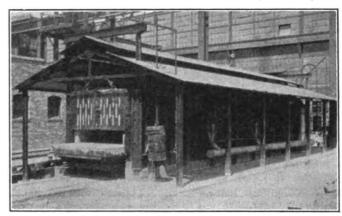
DeRemer-Blatchford Car Bottom Furnace for Annealing
